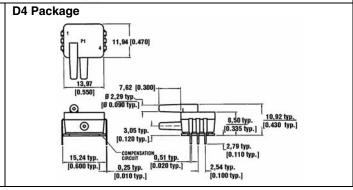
Mounting Dimensions (For Reference Only. mm/[in])
